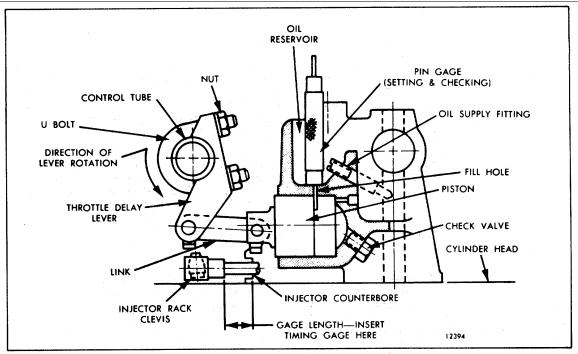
Adjusting Throttle Delay Cylinder (Current)
